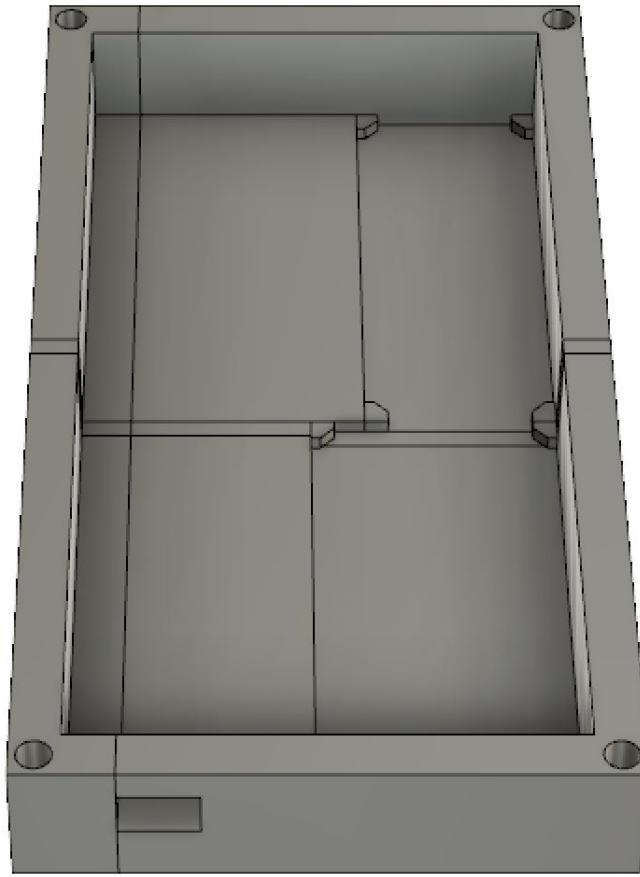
Board Side of Fanny Pack Housing.* This just hold the PCB boards and microcontroller. It is half of the box that is screwed together that is held in the fanny pack as seen in Figure 31. CAD done in Fusion360.
